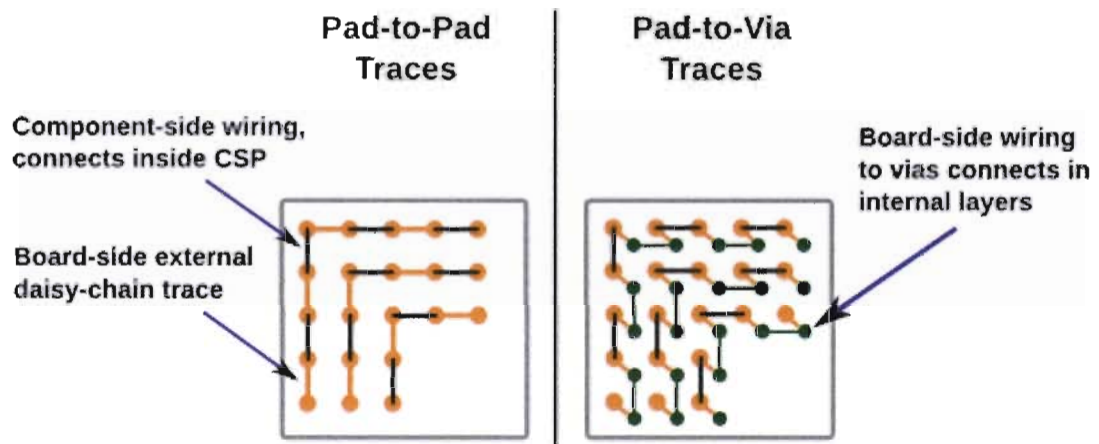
Example of copper pad-to-pad and pad-to-via routing for a common BGA
